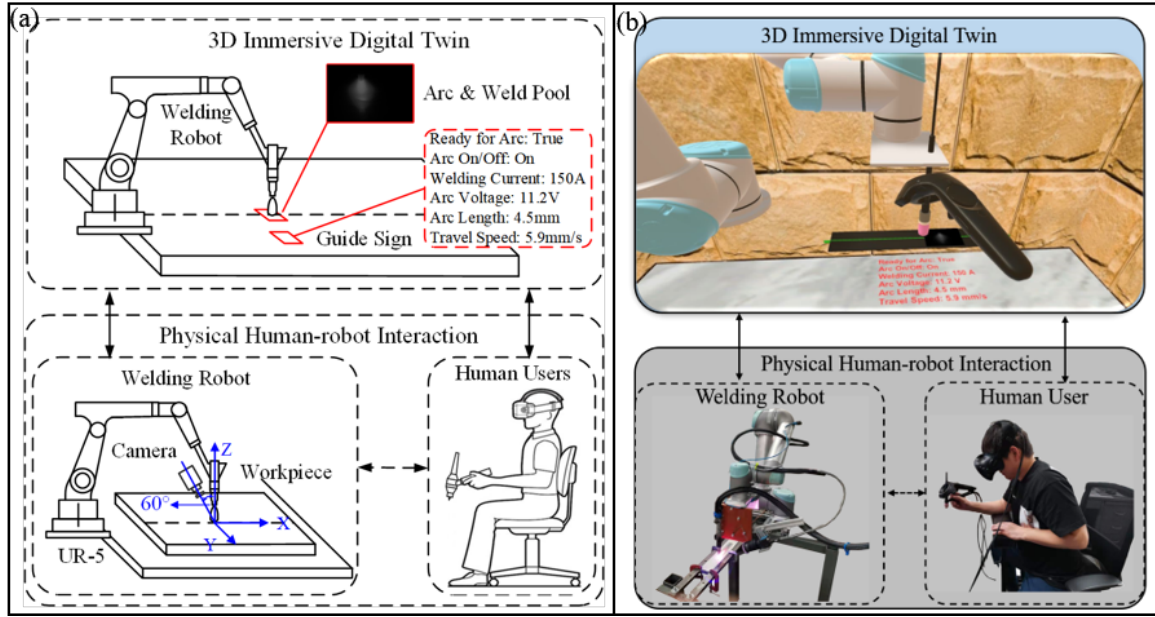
Developed Digital Twin for HRI in Welding Manufacturing (a) Schematic Diagram (b) Real Diagram.
